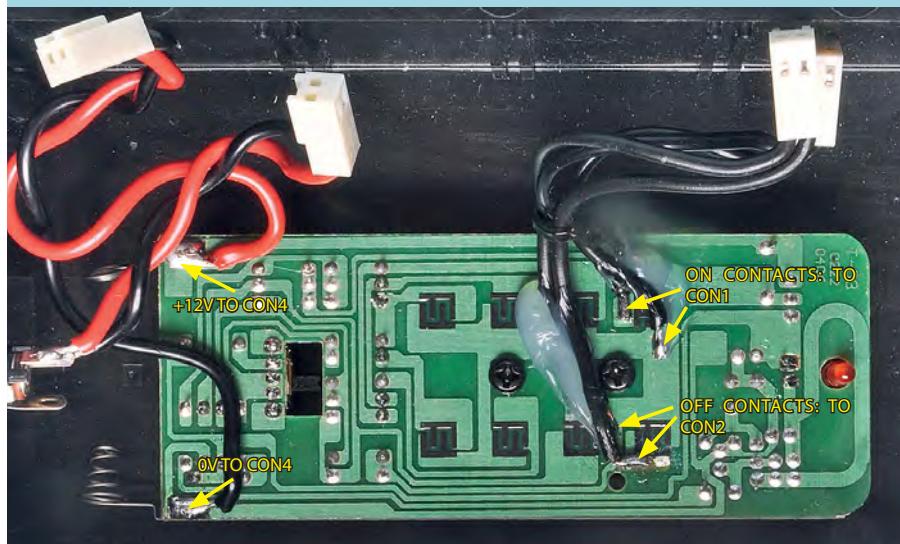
the wiring connections to the Jaycar UHF remote. You will need to scrape away the solder masking from some of the tracks before soldering the leads.
